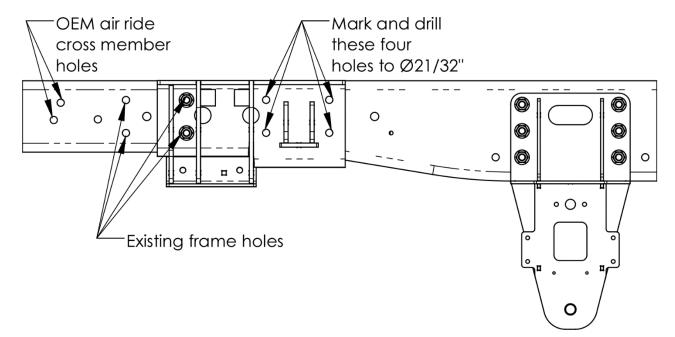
[DS155NDLP-A and -AC Suspensions Only] Passenger side template location for upper strut mount frame drilling.
